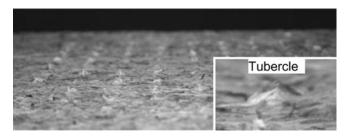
Surface of the board manufactured using the air-injection press. Tubercles were formed on both surfaces due to the holes in the press
